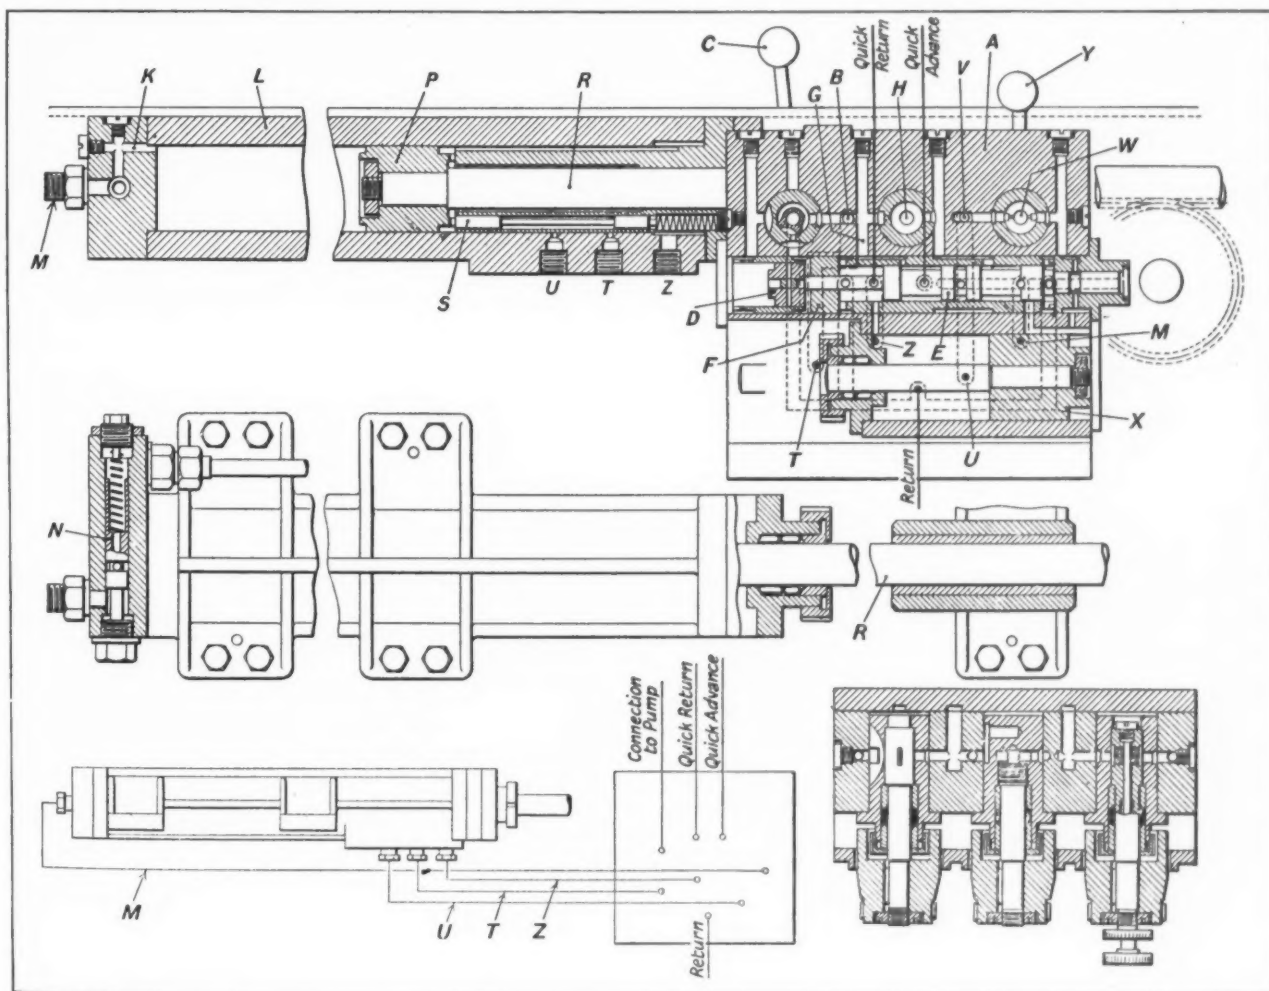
Hydraulic Control System for Wheel Feed on Grinding Machine
